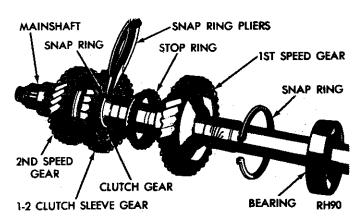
Removing/Installing 1-2 Clutch Gear And Snap Ring
